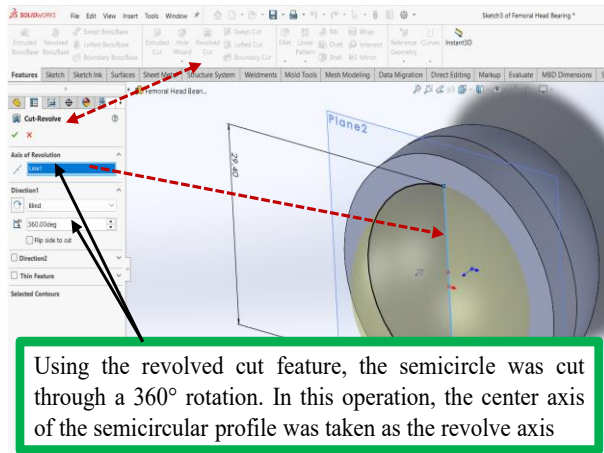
Creating the hemispherical cavity on the base of the Femoral Head Bearing solid model by applying a revolve cut
